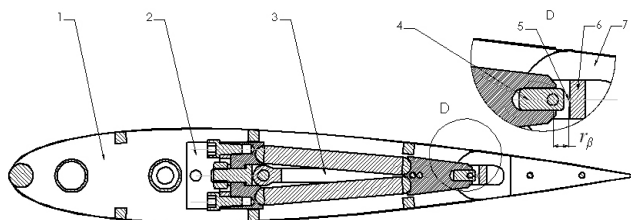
Actuator integration into the wing (SolidWorks model): 1, rib; 2, actuator support; 3, actuator; 4, slider; 5, hinge line; 6, ball-bearing support; and 7, flap rib.
